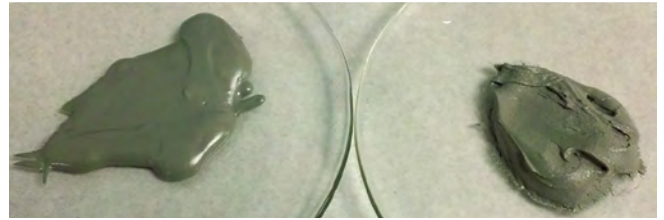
Fresh solder paste (L) versus aged solder paste (R).
